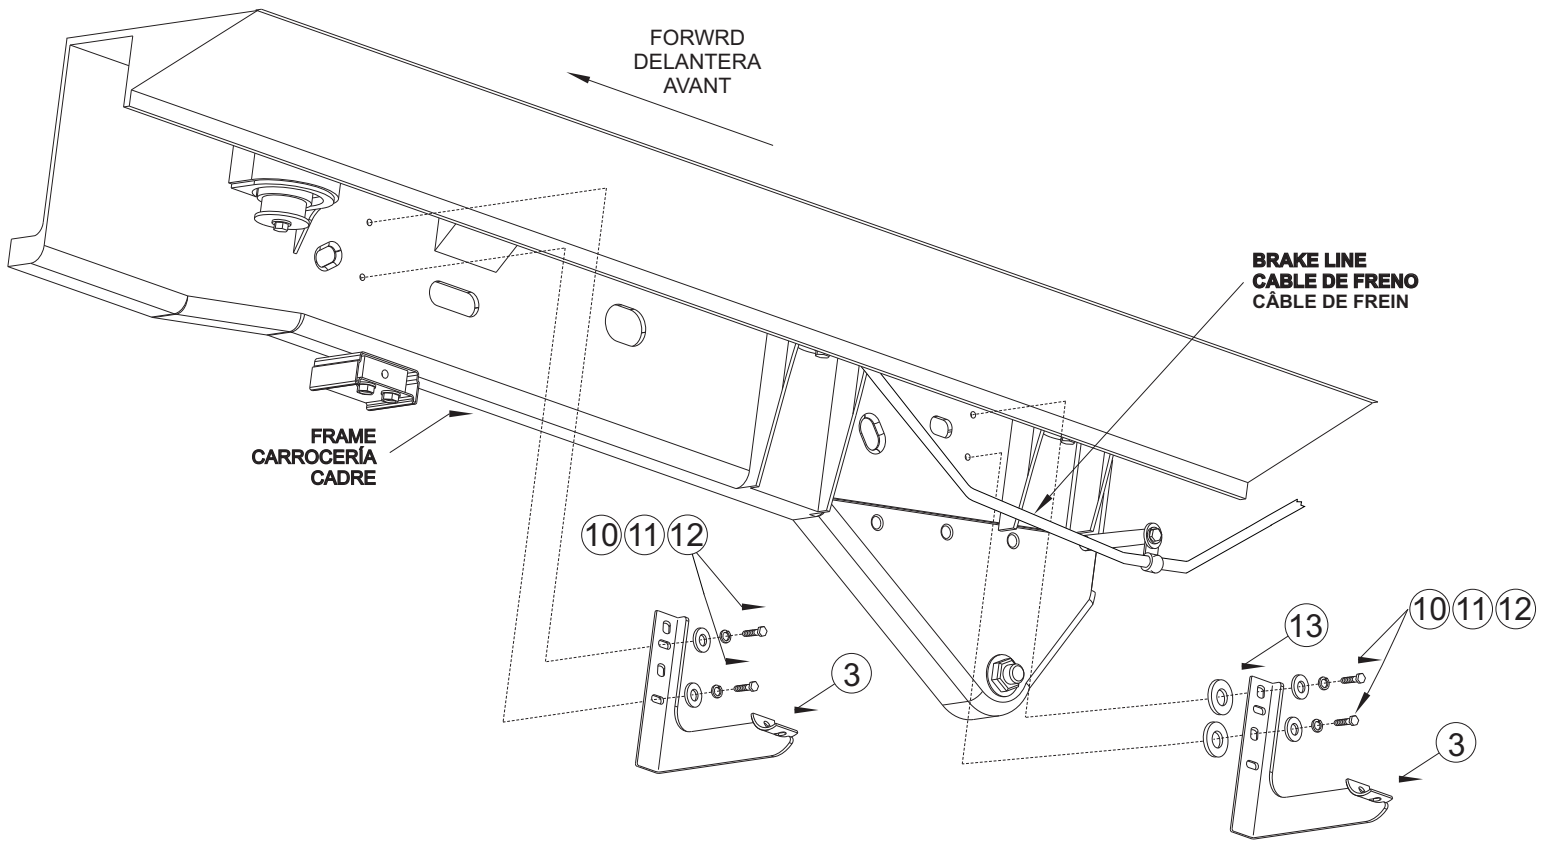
INSTALLATION VIEW OF DRIVER SIDE SHOWN, PASSENGER SIDE OPPOSITE
